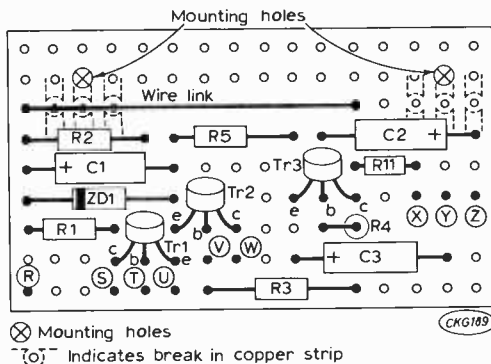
The component layout on Veroboard. The only breaks in the copper strip are those near the mounting holes.
